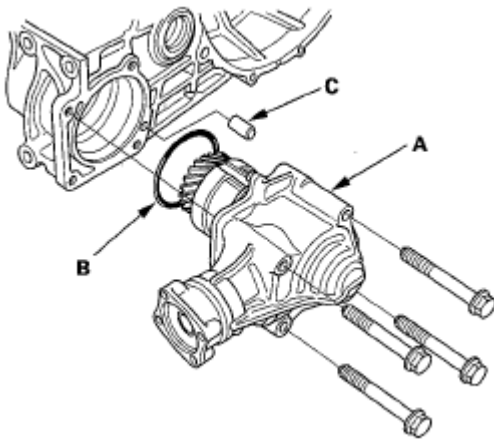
Identifying Transfer Assembly, O-Ring And Dowel Pin
